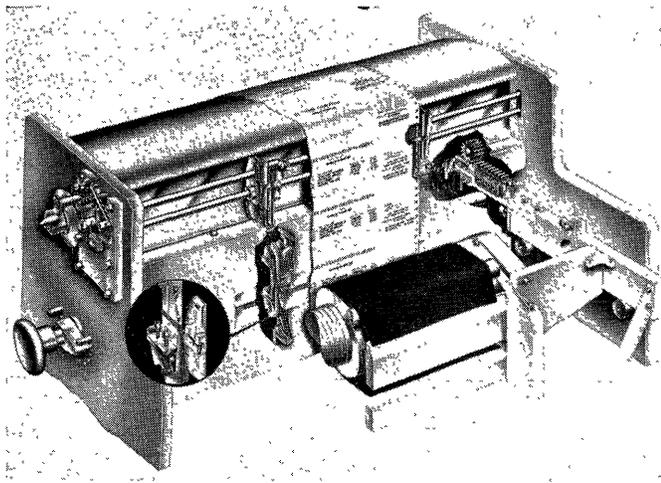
A cutaway view showing the actuator assembly, ribbon reel, and the gear and rack assembly for opening the paper feed area
